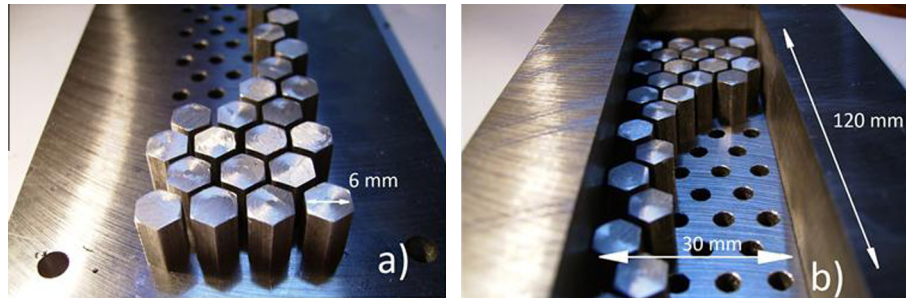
Mold with fixed inserts: (a) bottom plate and inserts and (b) pre-assembled honeycomb mold.
